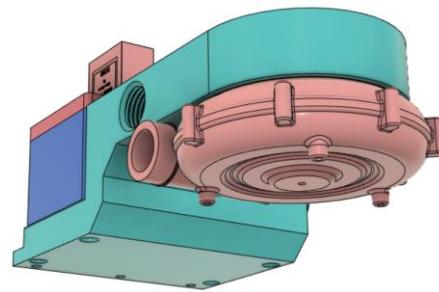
After press-fitting the WM7040 Pump to the Inlet Body
